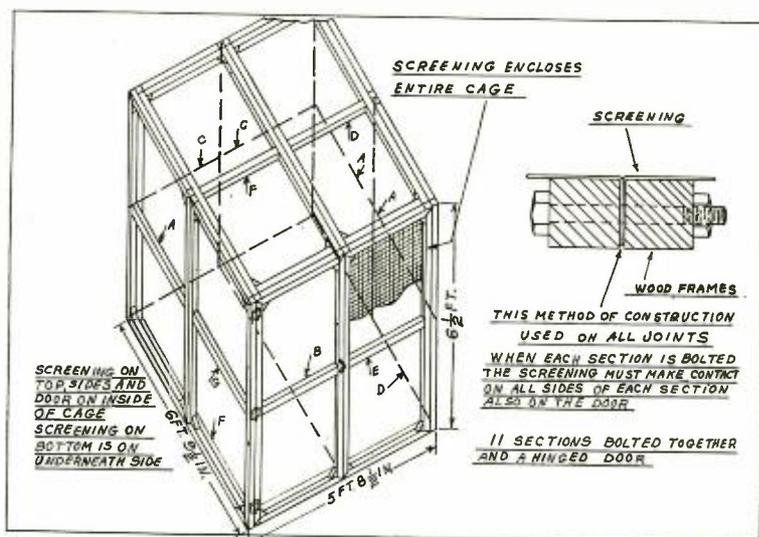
Assembly drawing showing construction of Diathermy screen.
